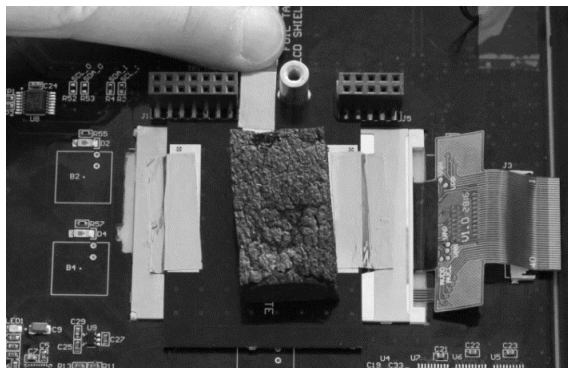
Press copper tape down onto C-01-139 button panel circuit board
